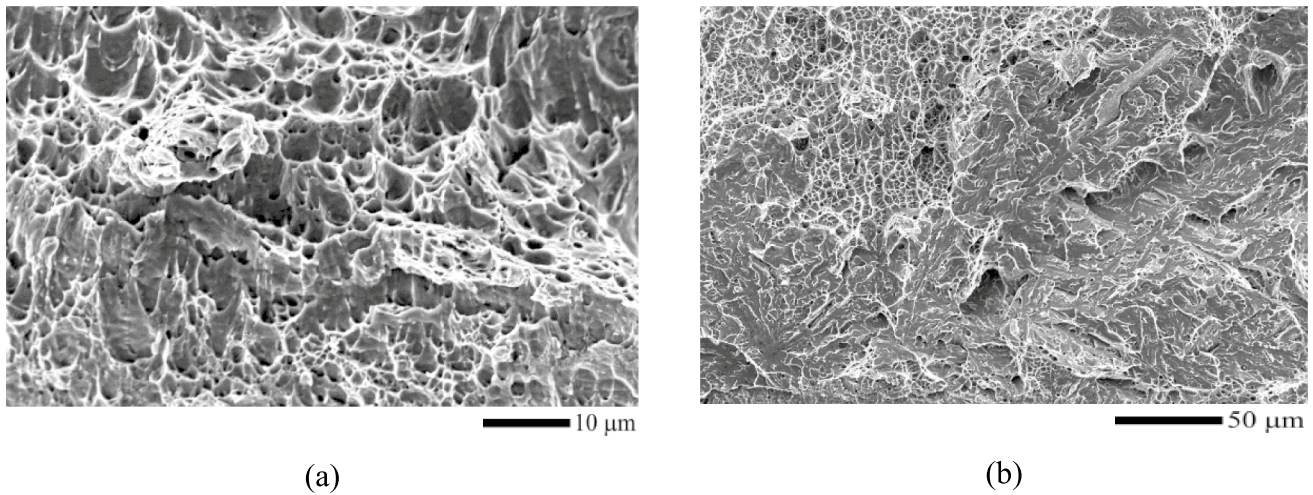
SEM images of fracture surfaces from standard fracture toughness tests. a Ductile fracture in BM; b brittle cleavage fracture in AW-WM
